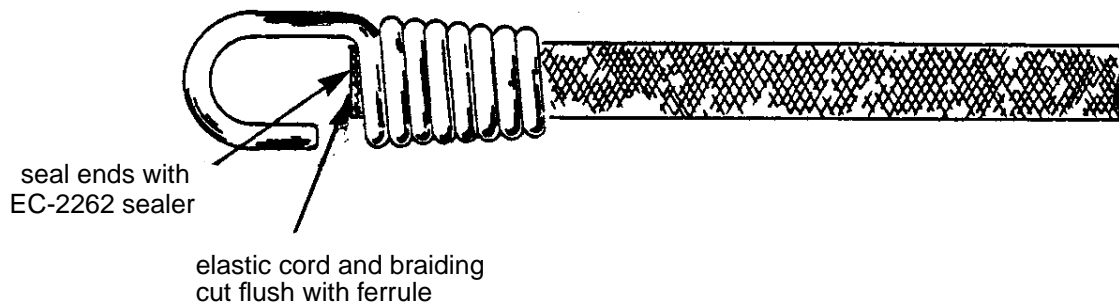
Assembly of Ring/Ferrule on Elastic Cord
